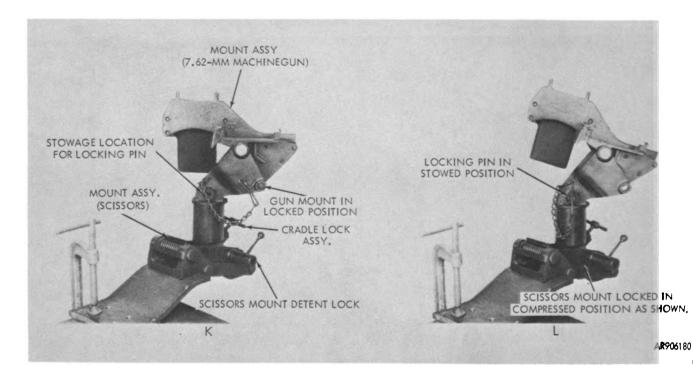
Low-profile cupola 7.62-mm machinegun scissors mount disassembly or assembly (vehicles serial numbered A1001 thru A1999 and A3375 thru A3999) (3 of 3).
